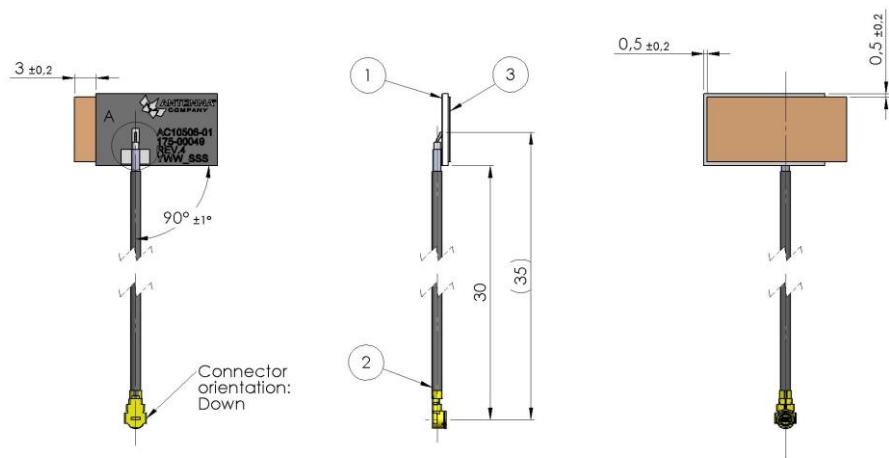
AC10506-01C top/bottom view and dimensions (mm)
